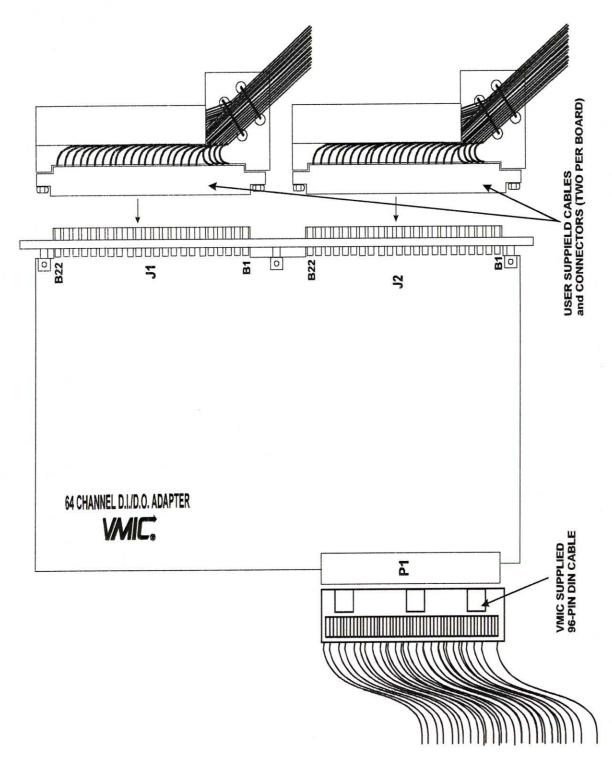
Cabling the 64-Channel D.I./D.O. Adapter Board
